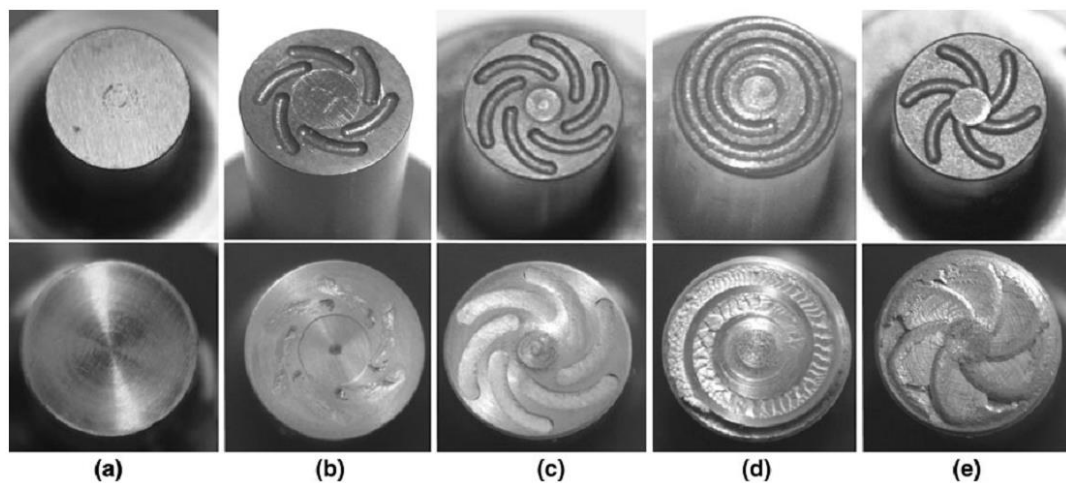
Different FSSW shoulder features shown before and after twenty welds: (a) featureless tool, (b) the short flute wiper tool (ii), (c) the long flute wiper tool (iii), (d) the fluted scroll tool (iv), and (e) the proud wiper tool (v) [Bakavos 2011].
